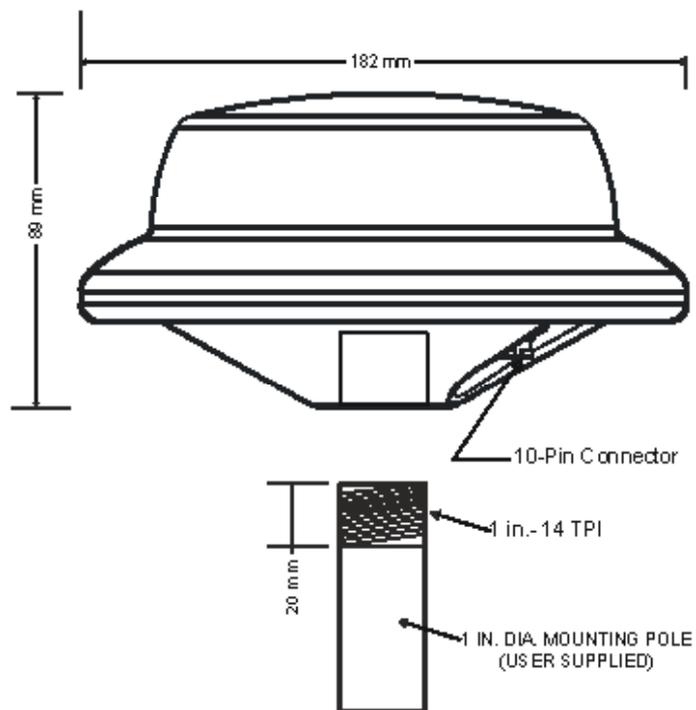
Standard Smart Antenna Dimensions and Mounting Specifications
